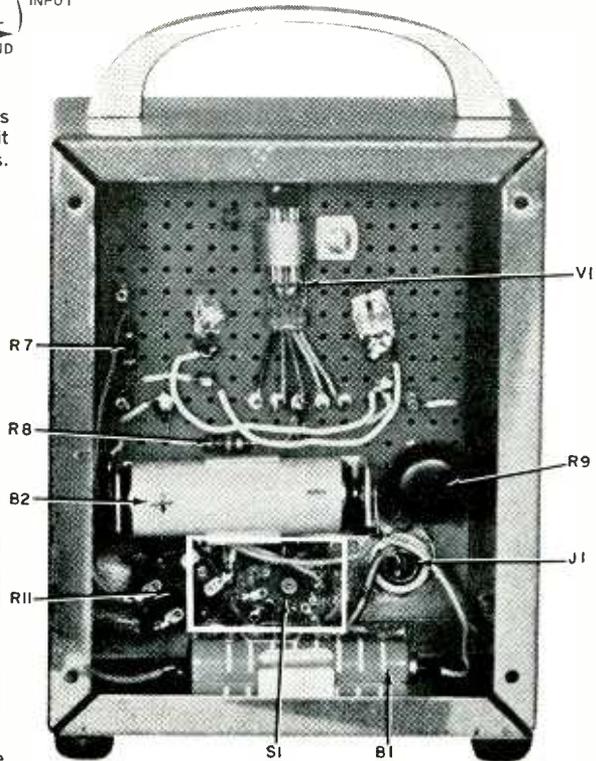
Preassembly the resistors and the switch in "turret" fashion before mounting.
